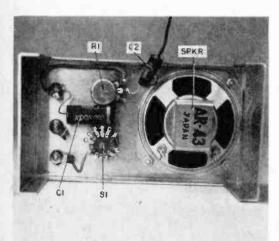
Chassis-mounted parts inside the box cover include the speaker, switch, potentiometer, jacks and two capacitors. Wire these in place separately.
